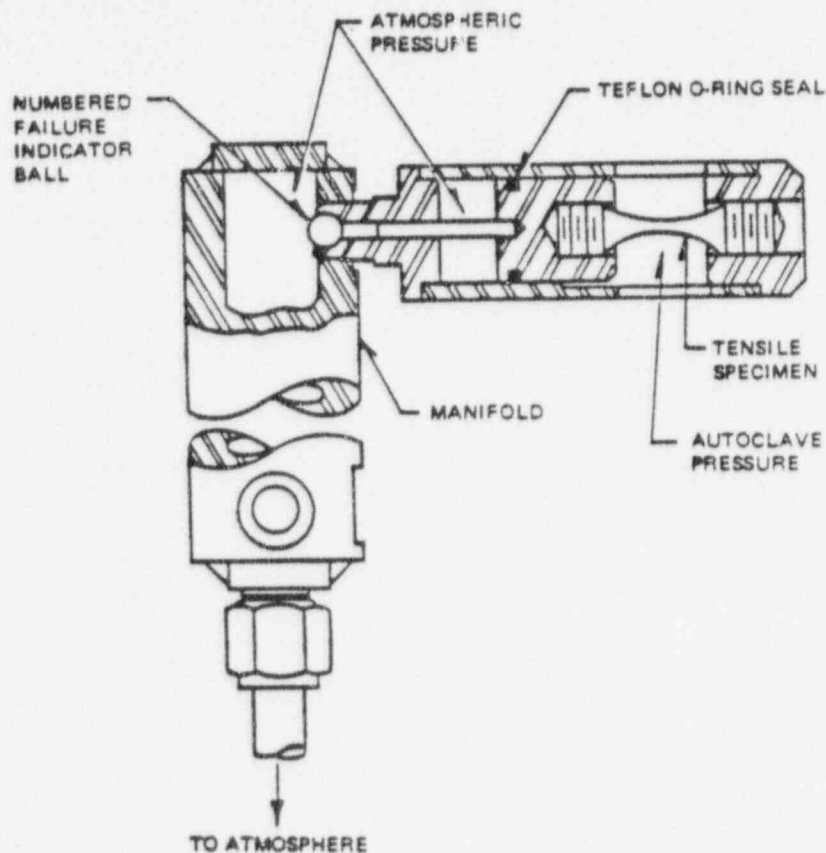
Uniaxial Tensile Specimen Loading Module
